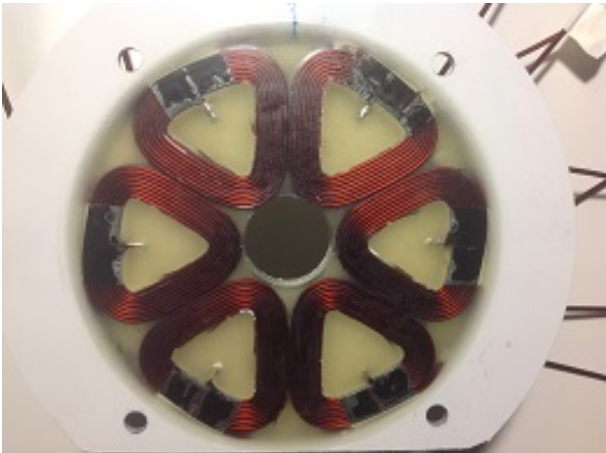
A manufactured stator side - 6 coils set in a polyester epoxy.
